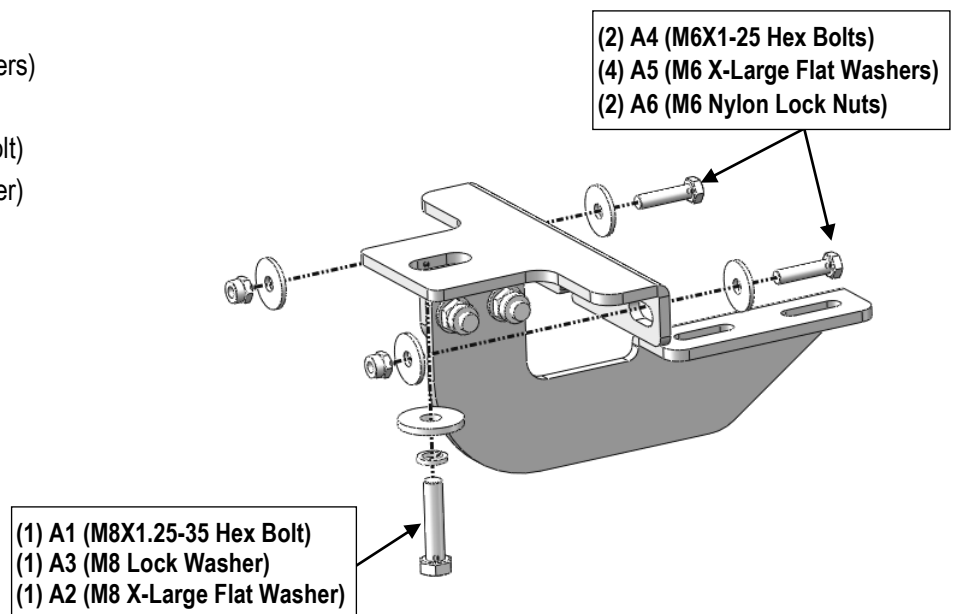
Driver Center Mounting Bracket (DCM+DCB) Installation
